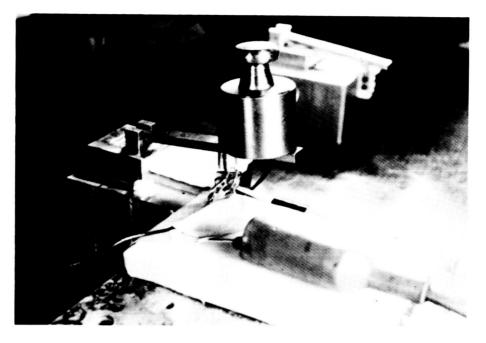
Solder joint (wire to bifurcated terminal) in test fixture for electrical resistance measurement (R105343).
